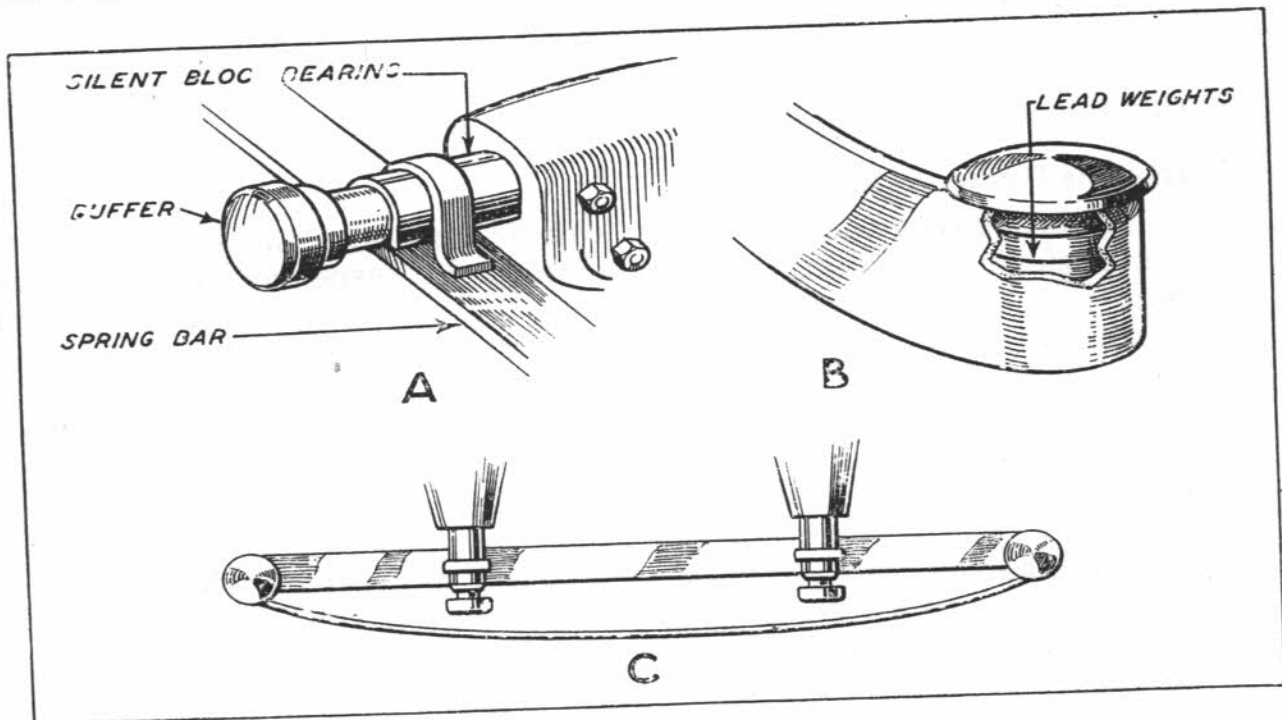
DETAILS OF THE WILMOT STABILISING BUMPER.
